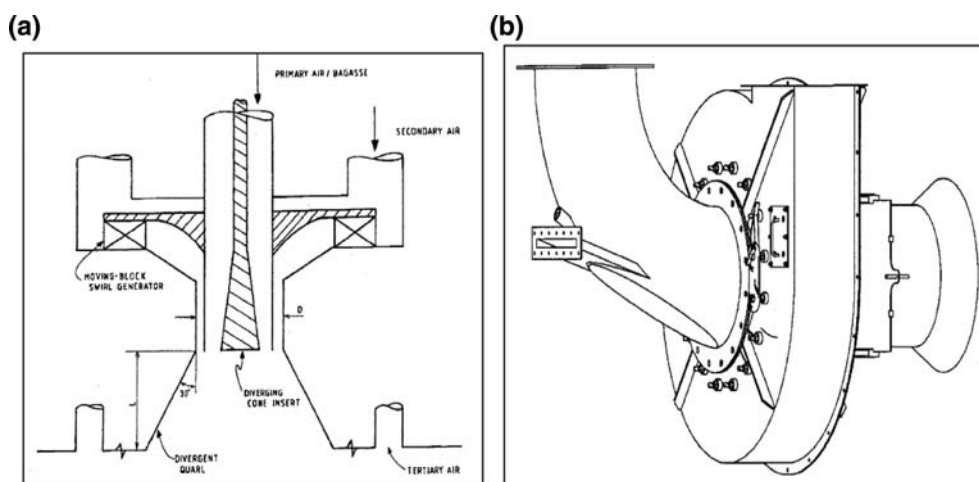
Swirl burner design applied to bagasse (a) Cross-section (b) Arrangement [10]
